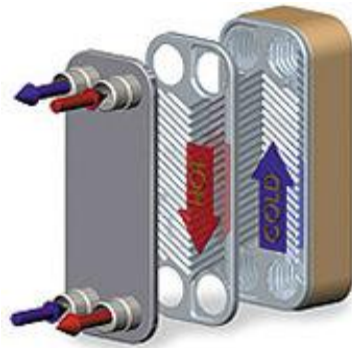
An exploded view of a plate-and-frame heat exchanger [8]
